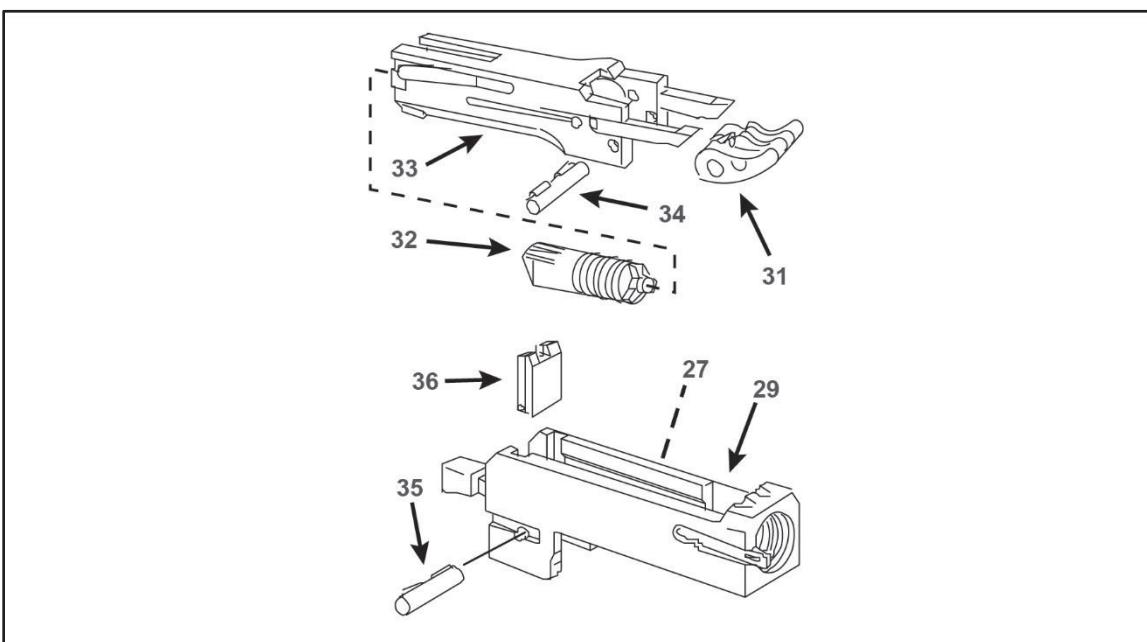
Removal of the barrel buffer and the barrel extension assemblies
